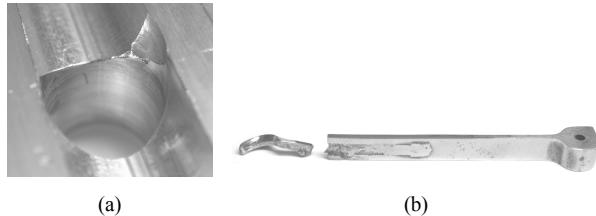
Examples of excessive cutting and tool damage in the second design: (a) burr edge with excessive cutting, (b) damaged tool.
